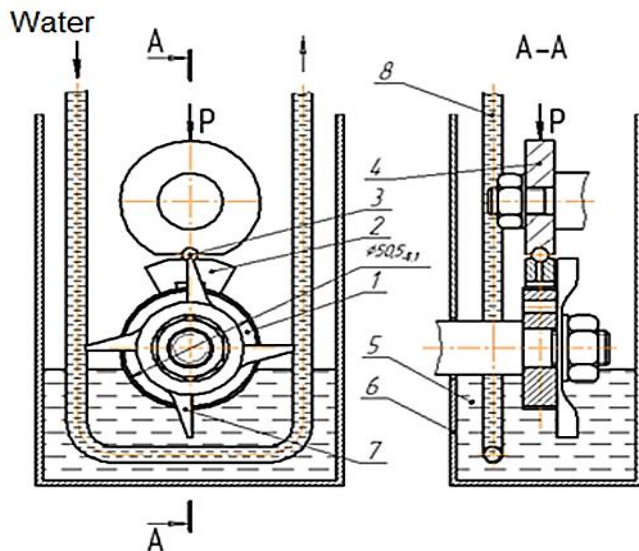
The scheme of wear tests on the SMC-2 installation. 1- coated sample; 2- cast iron pad; 3- hardened steel ball; 4- stop on the carriage of the friction machine; 5- oil-abrasive mixture; 6- chamber body; 7- blades for mixing oil-abrasive mixture; 8- heat exchanger.
